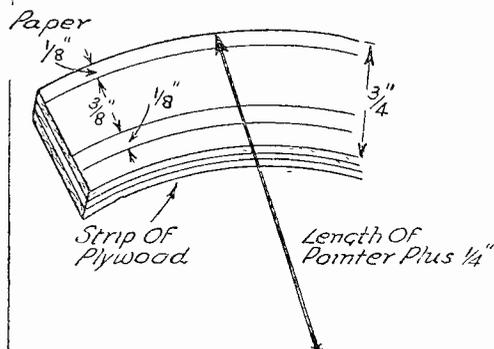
Showing how the paper scale is drawn and mounted on a strip of wood.
